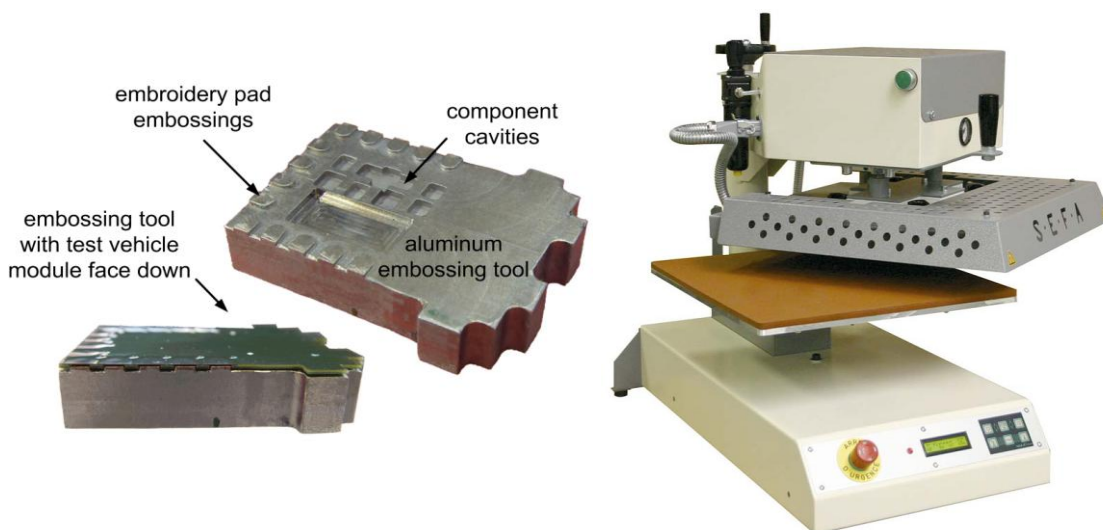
Embossing tool (left) and thermopress HP45S from SEFA (right)
